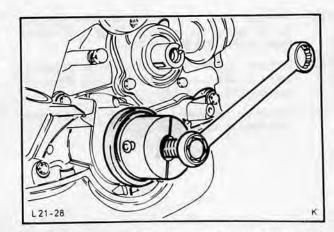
Remove crankshaft pulley using Special Tool 21-028
